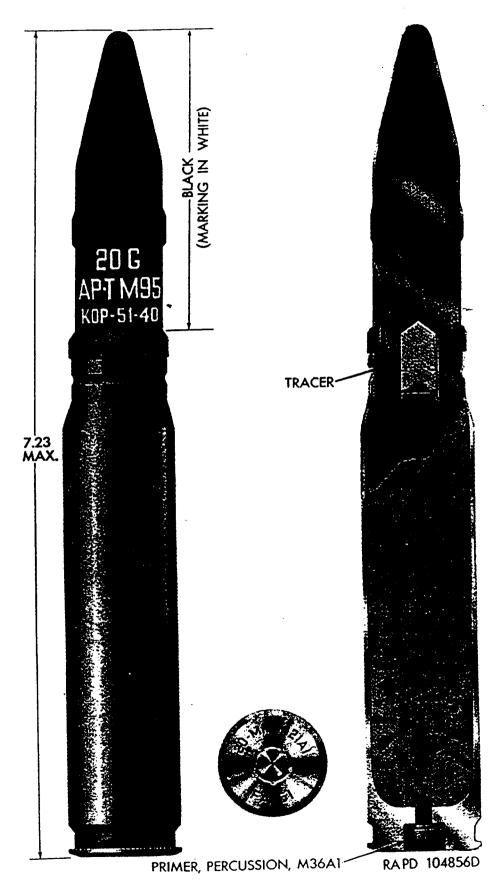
Cartridg2, 20 millimeter: AP-T, M95.
